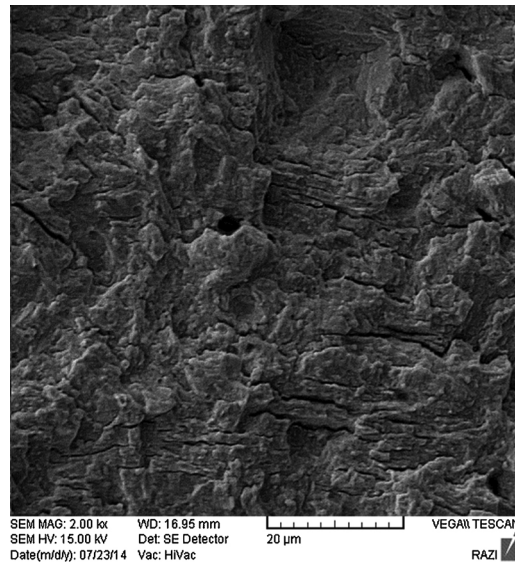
Fatigue fracture surface of the bolt.
